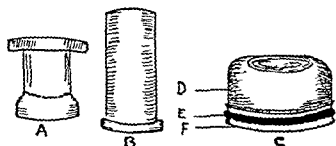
Parts of clasp-ring actual size. A Clasp end B Cylinder C Ring end D Outer ring E Rubber ring F Inner ring
